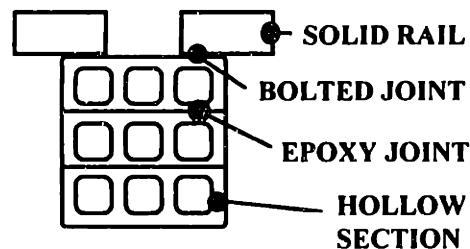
Cross-section of a ceramic machine tool base structure.
